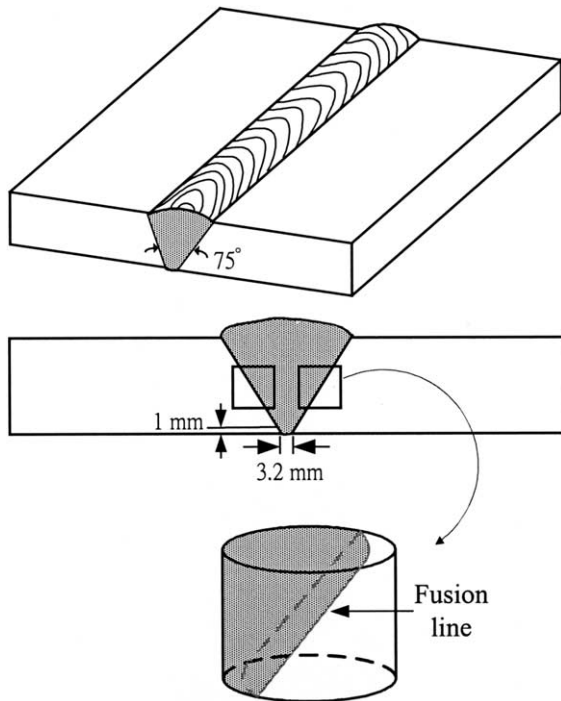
Schematic representation of specimens used in GTAW welding.
